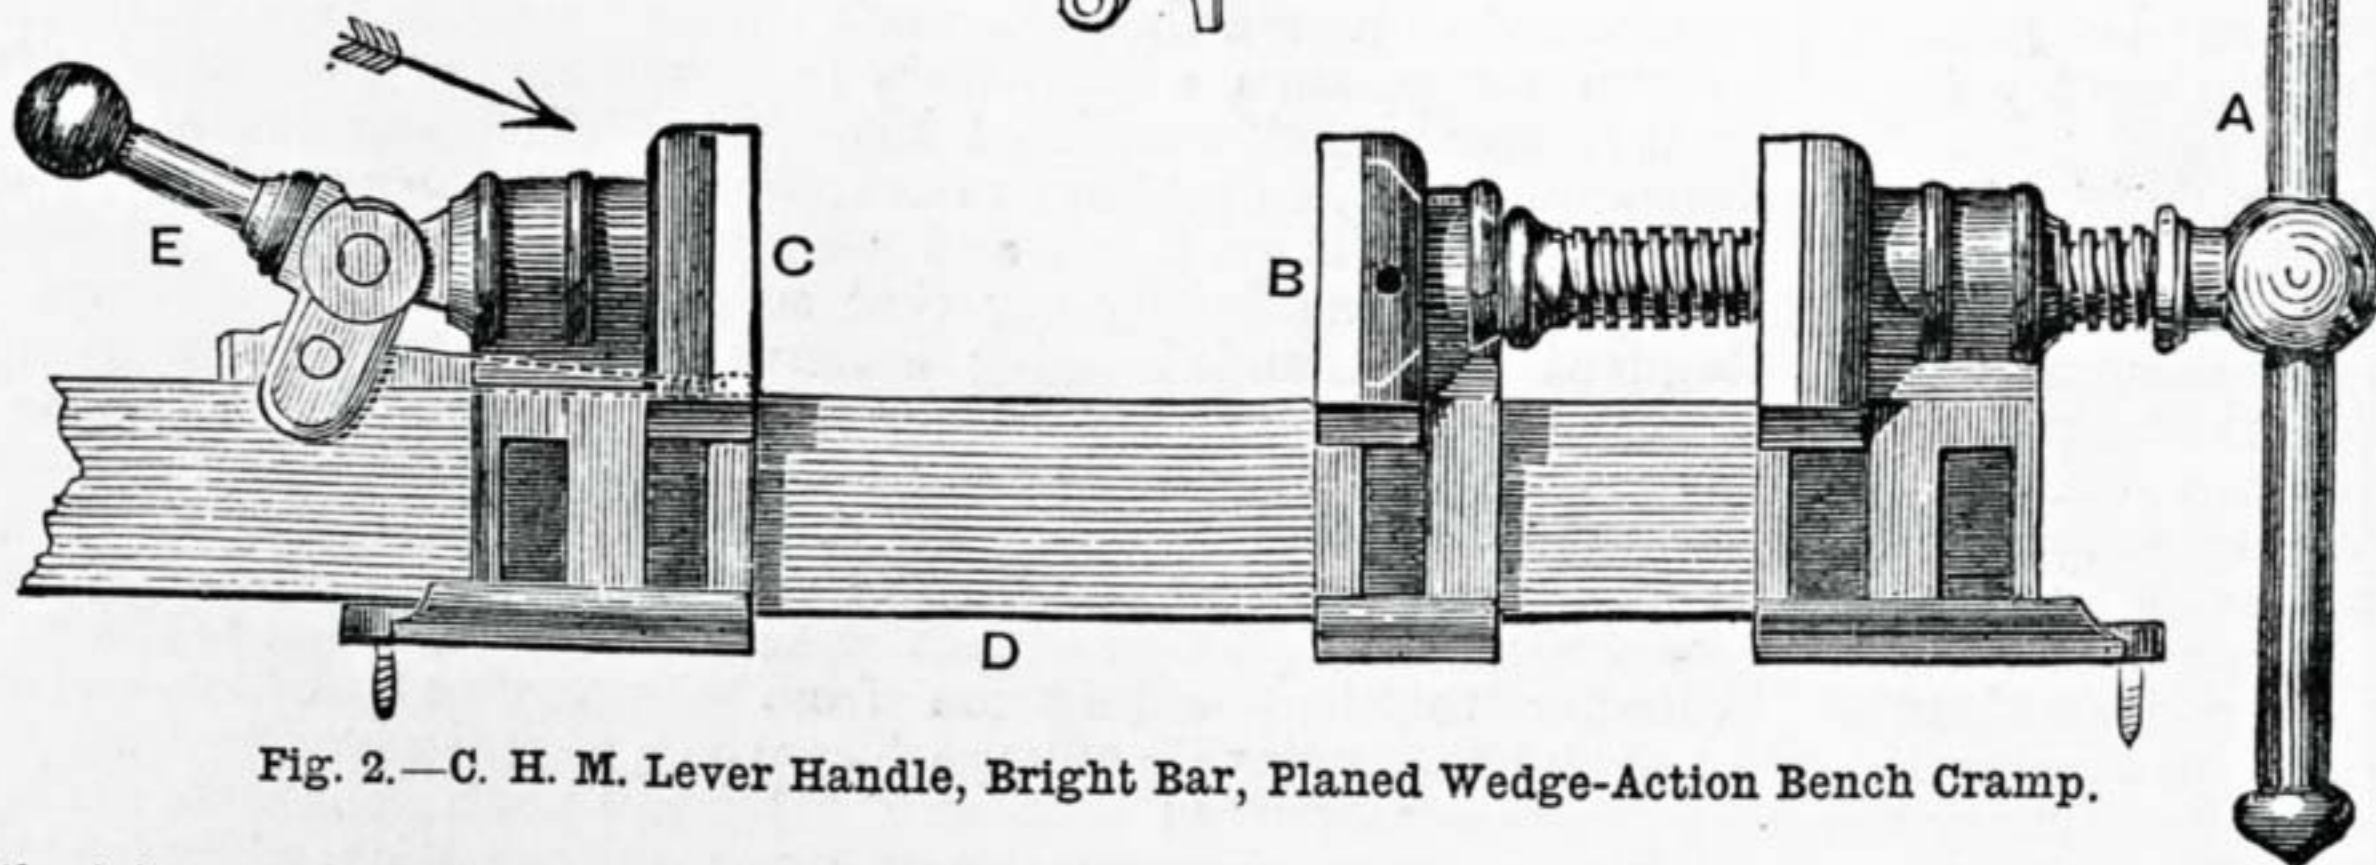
C. H. M. Lever Handle, Bright Bar, Planed Wedge-Action Bench Cramp.
